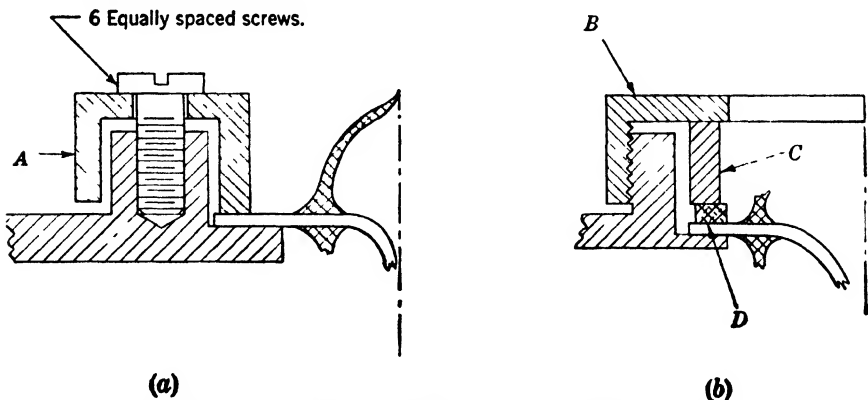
Methods of clamping cell-type TR tubes into cavities.
